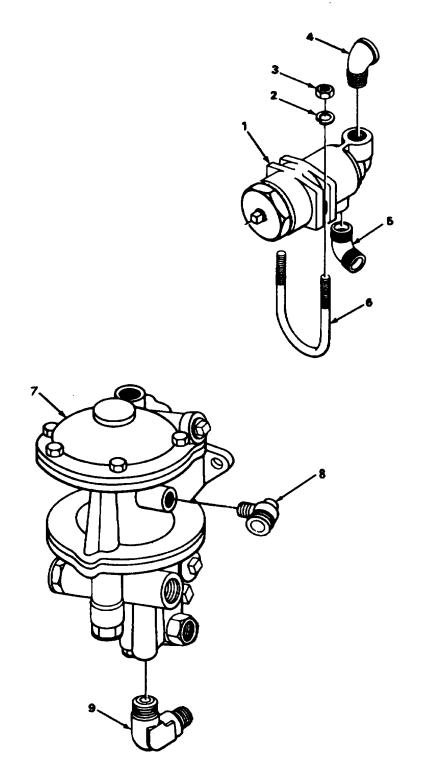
AIR FILTER ASSEMBLY AND EMERGENCY RELAY VALVE.
